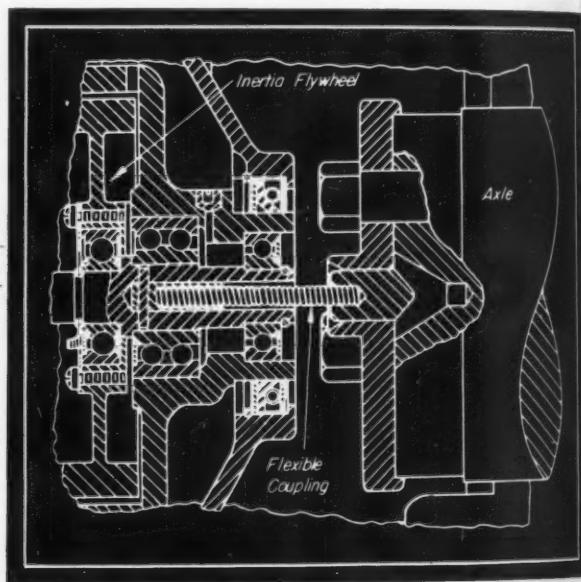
Above—A flexible coupling drives this rotary inertia device used to control sliding railway wheels
